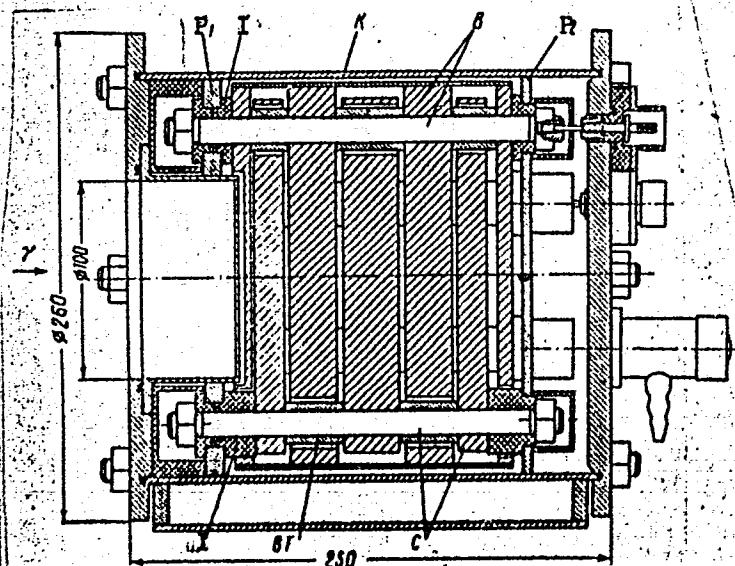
Construction of new quantum meter. B -- high voltage electrodes; C -- gathering electrodes; BT -- spacer bushings; I -- insulators; K -- outer jacket; P₁, P₂ -- front and back panels of the quantum meter.
